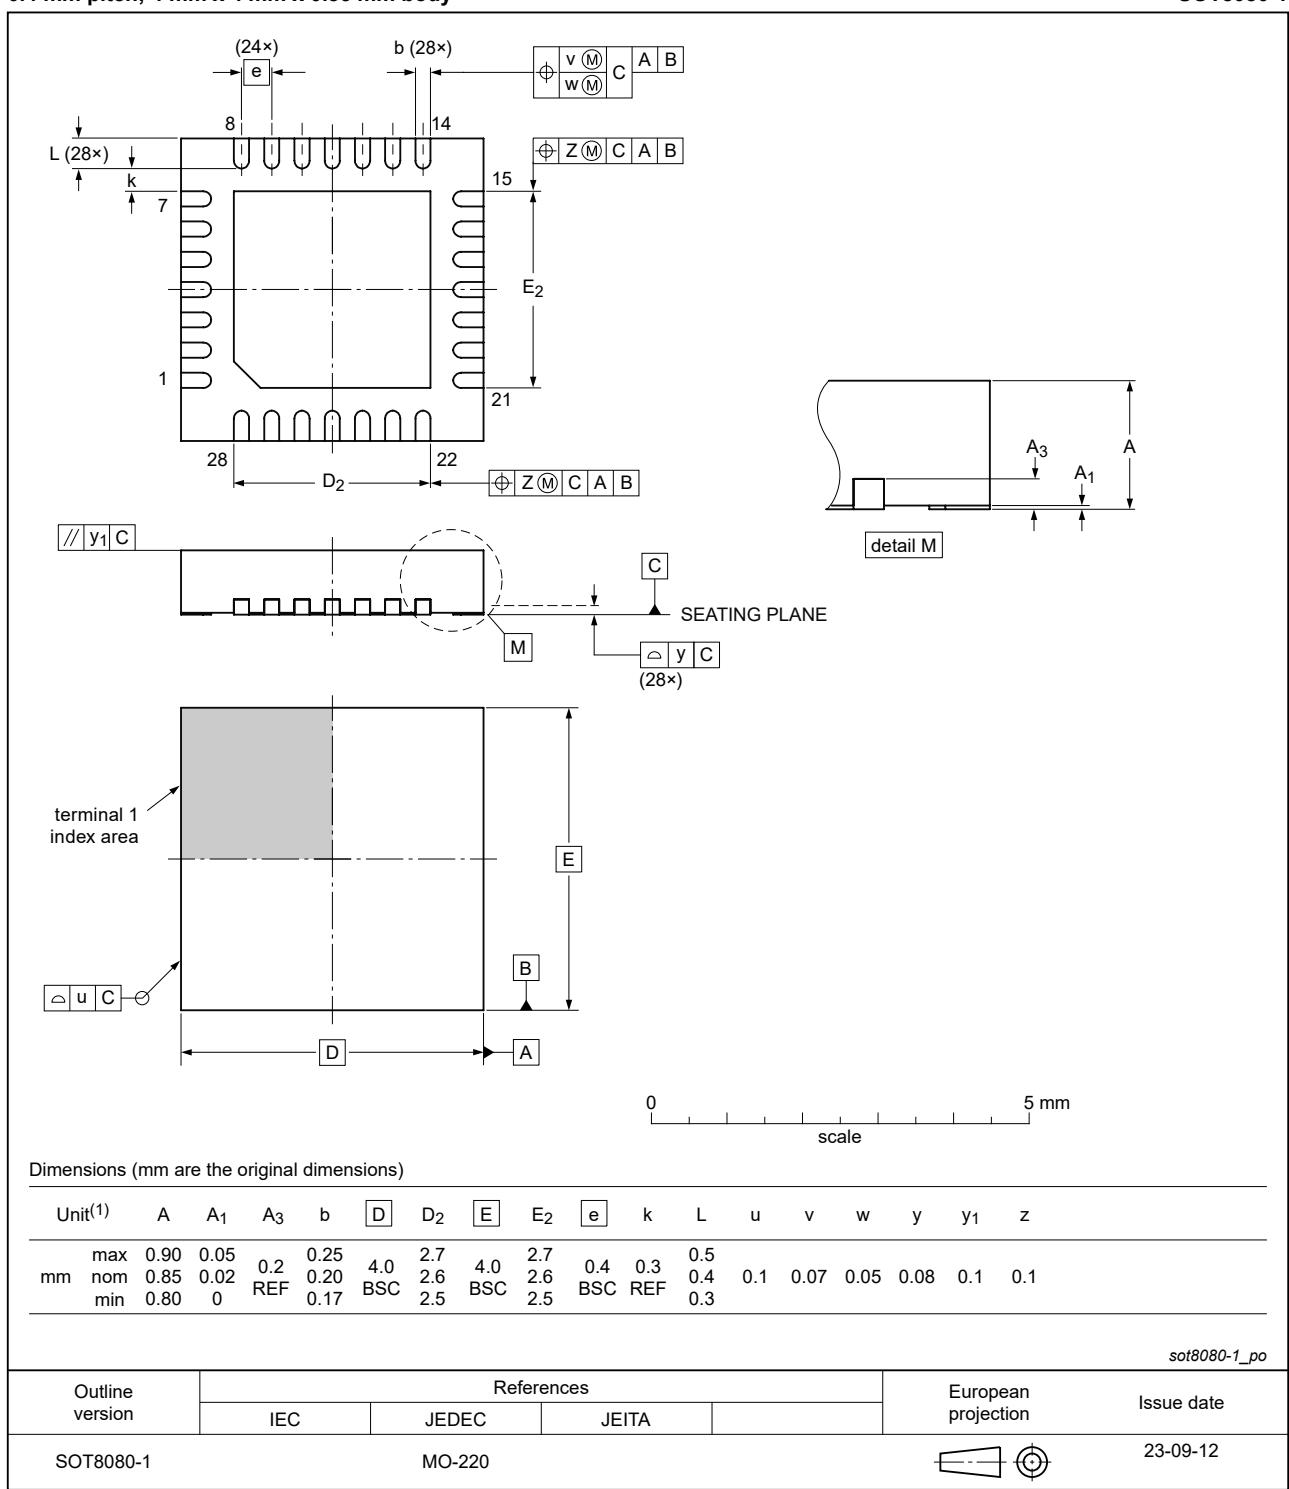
Package outline SOT8080-1 (HVQFN28)
